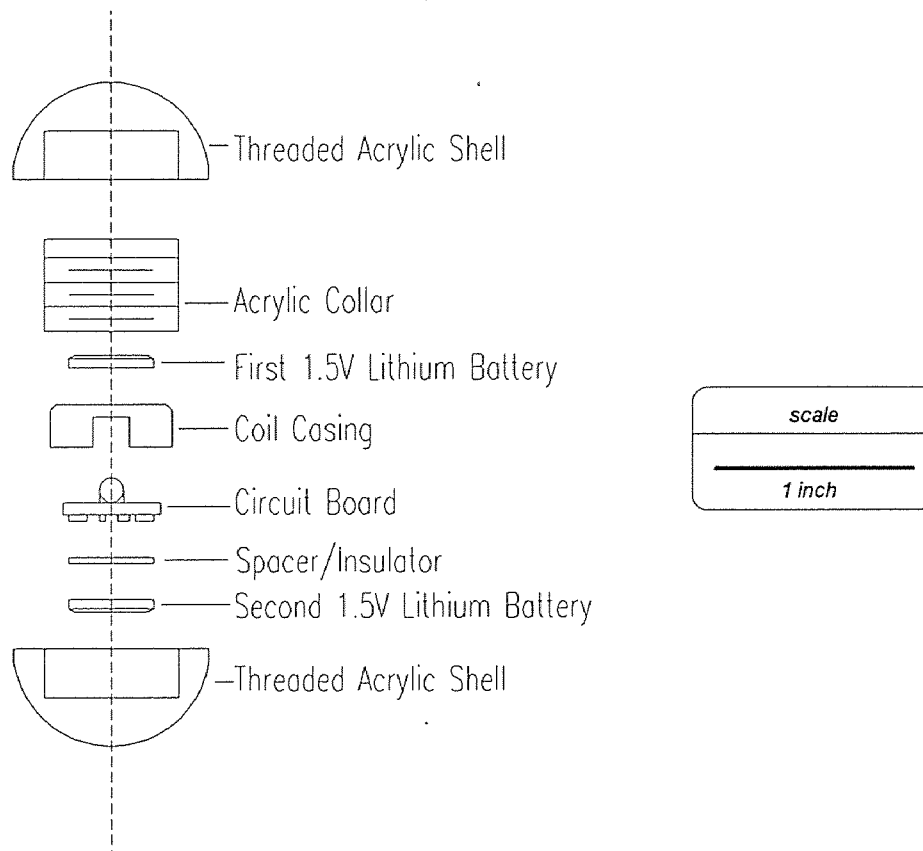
2.04 MHz Transmitter Assembly. This exploded view of the 2.04 packaged transmitter is a sketch showing the actual size of components within the tracking sphere.
